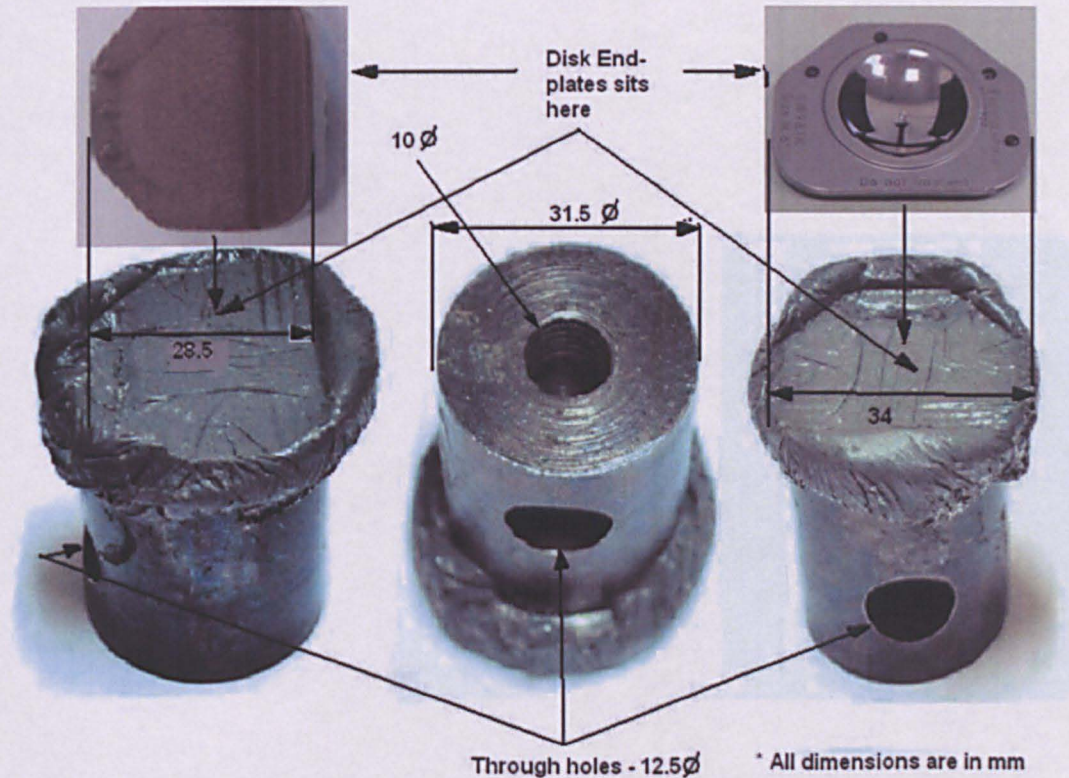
Artificial spinal disc prosthesis – load cell holding fixtures for compressive loading upto 4 kN with important dimensions.
